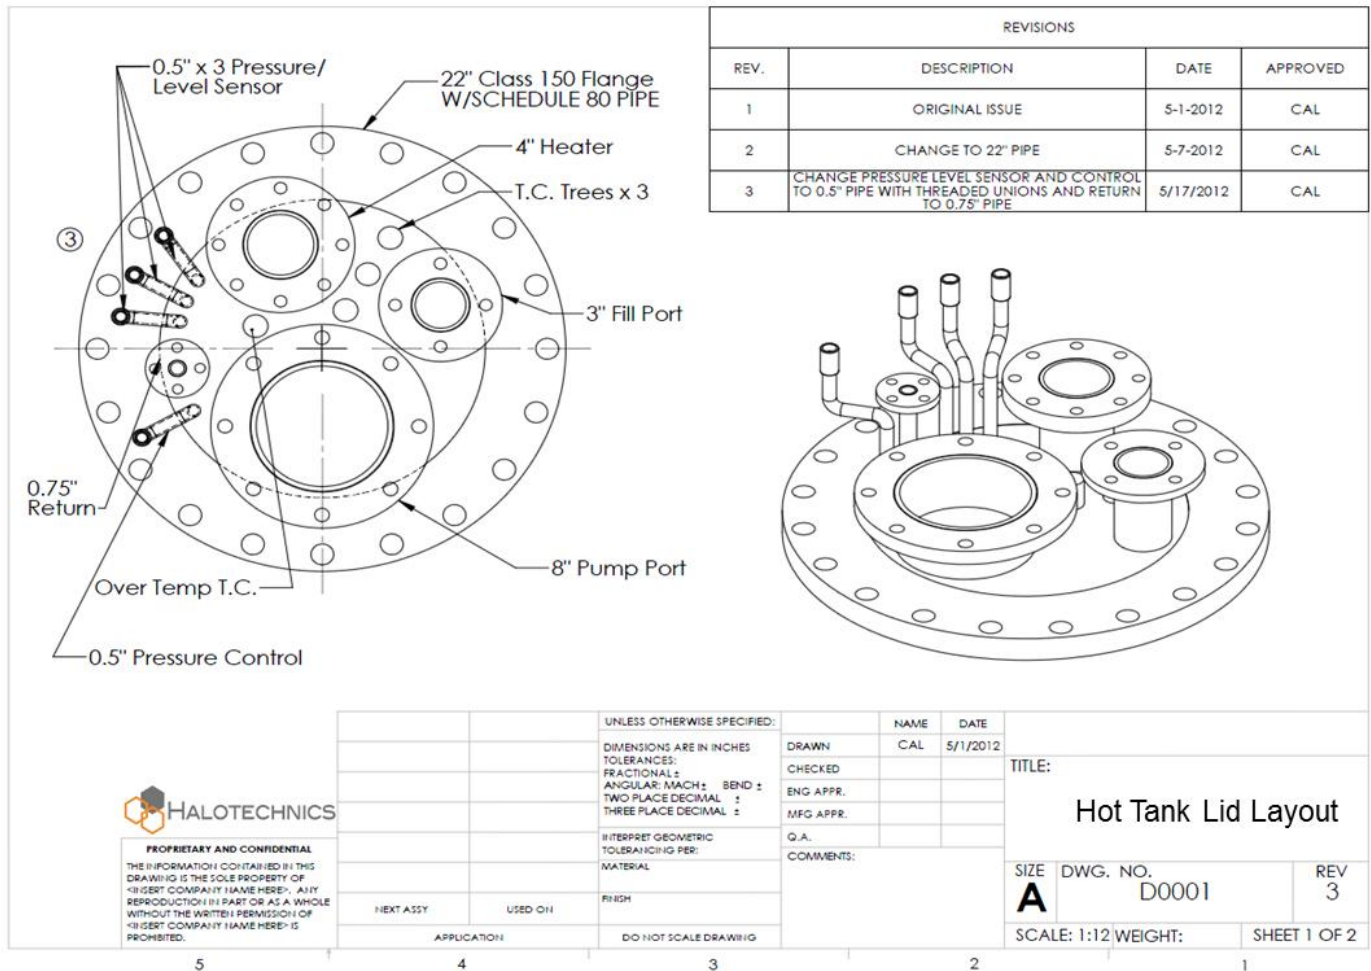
Lid detail; the hot tank lid detail is identical to the cold tank but all flange and piping is 316 SS.
